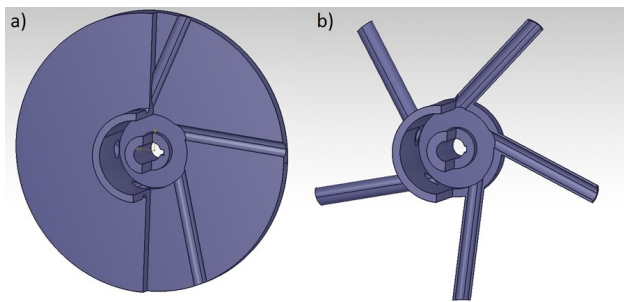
Comparison of geometry of rotors of special centrifugal pumps: a) hole impeller, b) multi-piped impeller
